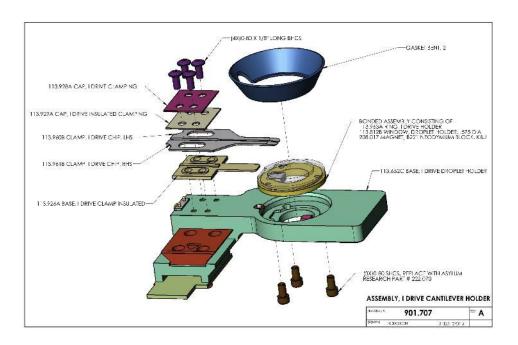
Droplet Cantilever Holder Assembly Overview
